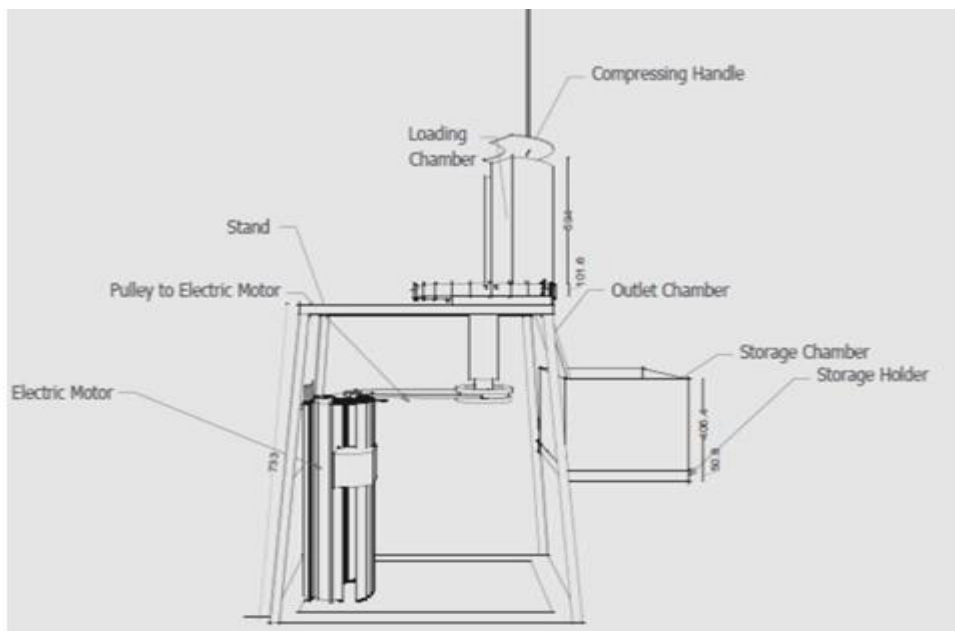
Left Side View of the Improved Continuous Plantain Slicing Machine
